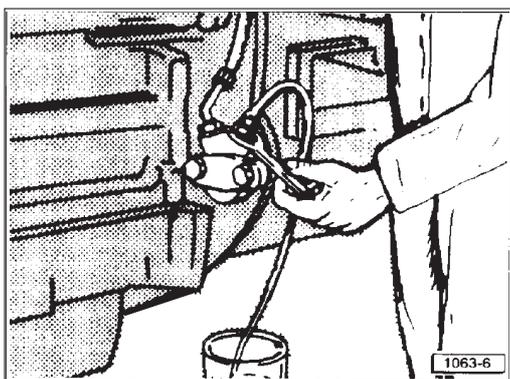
Bleeding the air from the clutch hydraulic circuit.
